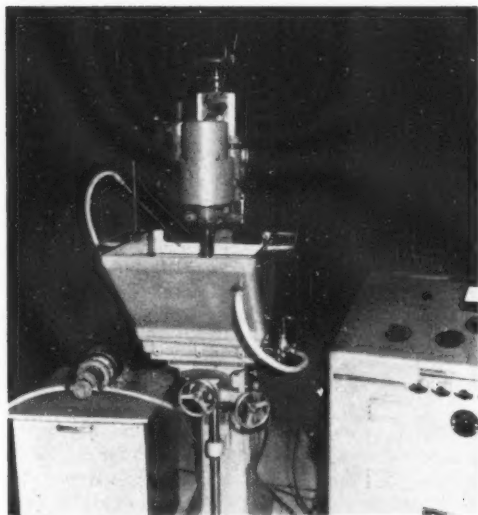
Ultraelectric machine which combines the techniques of ultrasonic and spark-erosion machining
